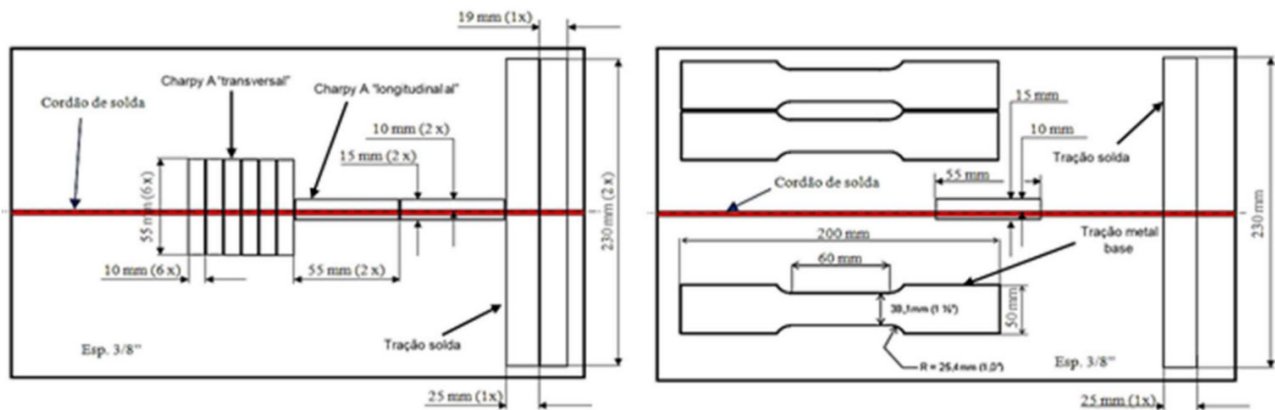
3/8" x 400 x 127 mm plates intended for autogenous welding, which will be extracted by water cutting the specimens for Charpy A testing and traction on the base metal and welded joint
